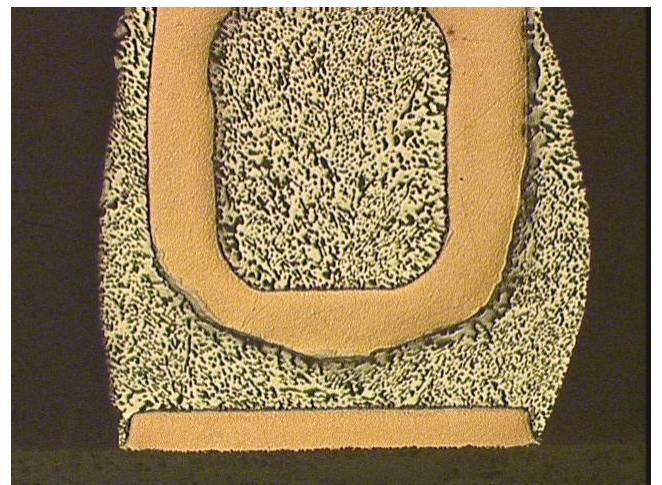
SEARAY, Typical Solder Joints, SnPb Alloy
